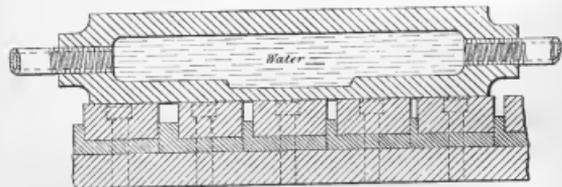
Wicks rotary typecaster; angle-base moulds. Scale: full size.
